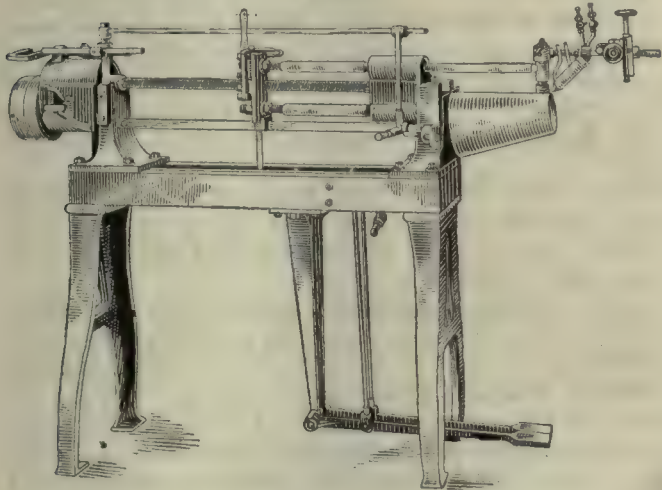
LIGHT SEAM WELDING MACHINE
